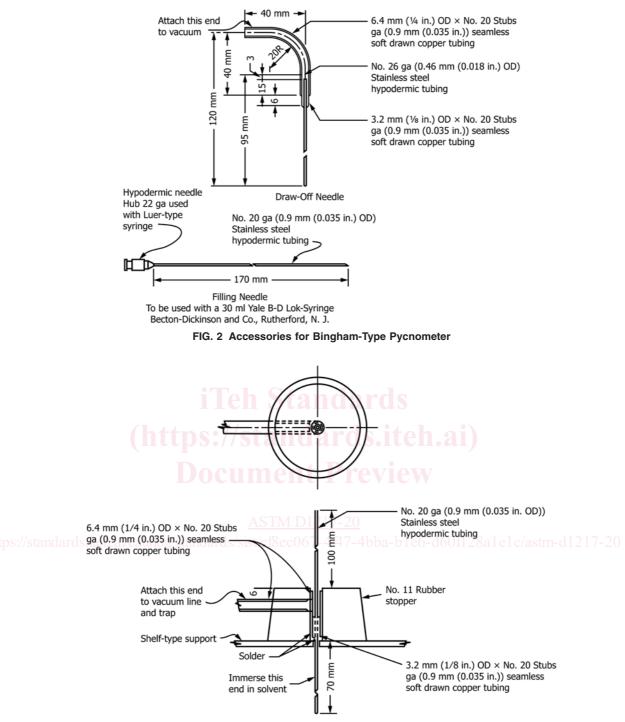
Cleaner Assembly for Bingham-Type Pycnometer
